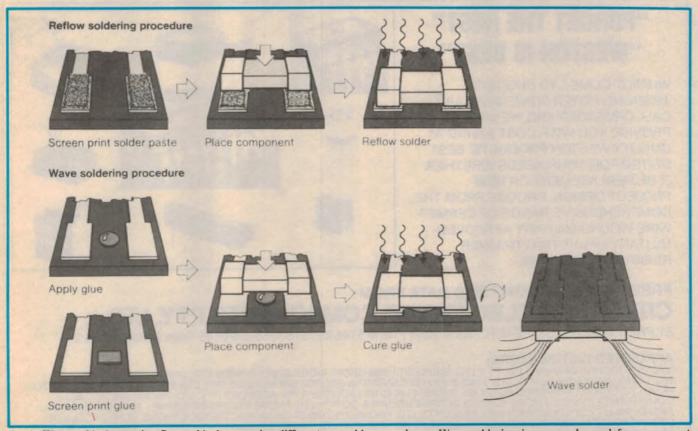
Wave soldering and reflow soldering require different assembly procedures. Wave soldering is commonly used for components below the board. (Diagram by courtesy of Siemens.)
